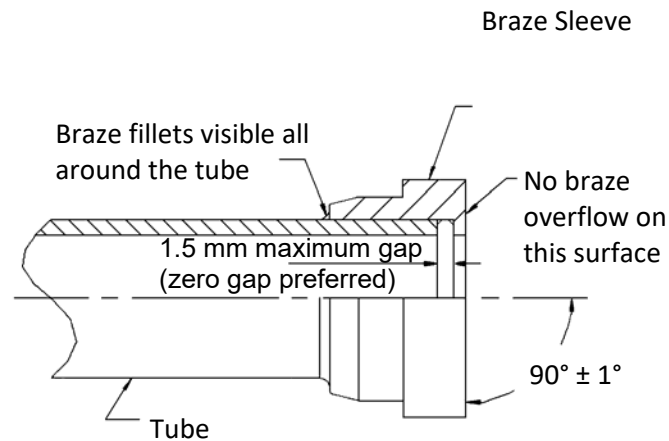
Brazed Sleeve for O-ring Face Seal Connector
